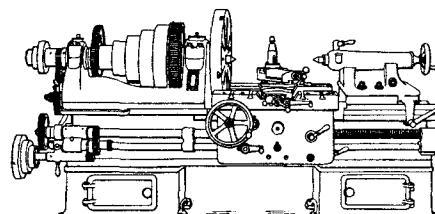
24-inch Swing Engine Lathe built by the R. K. Le Blond Machine Tool Company.
